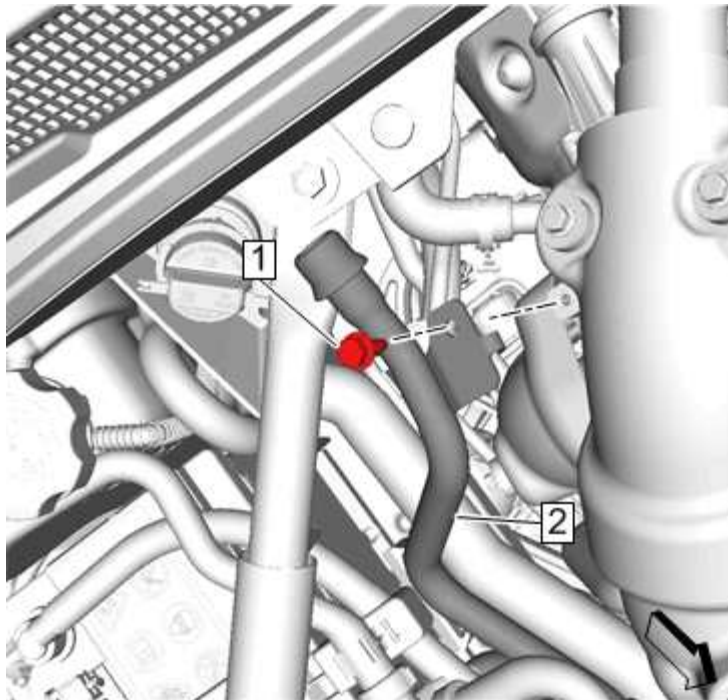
Heater Outlet Pipe And Retainer Bolt
